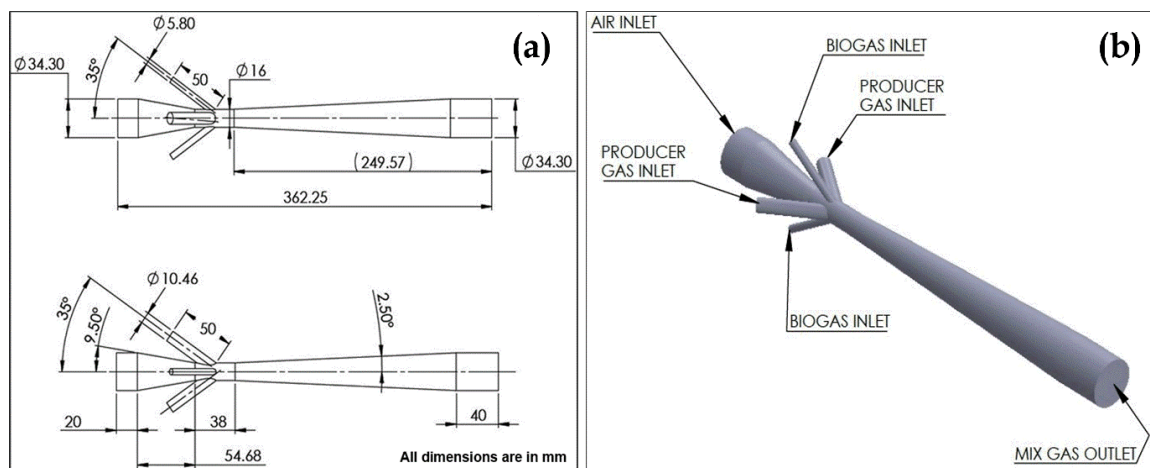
Design of the venturi mixer (a) Dimensions of parts (b) three dimensional (3D) model
